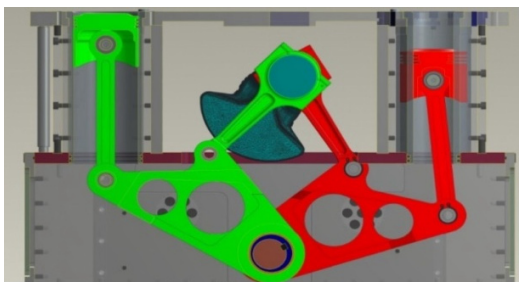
Cross-section of a VCR engine with a view of the piston crank set
